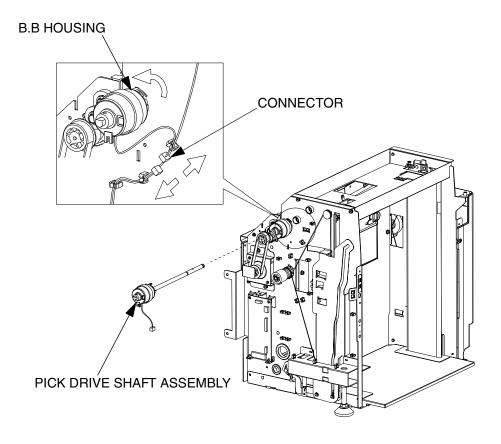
Removal of the Pick Drive Shaft Assembly
